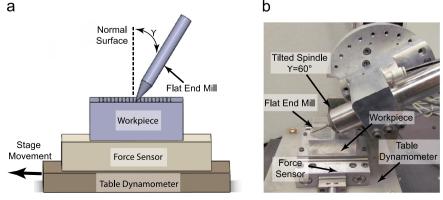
(a) Schematic of the machining system used. The flat end mill is tilted with respect to the surface normal of the workpiece to produce the dimpled surface. (b) Photograph of the end mill setup used to produce the dimpled surfaces. The spindle in this case is at an inclination angle (γ) of 60° with a flat end mill attached.
